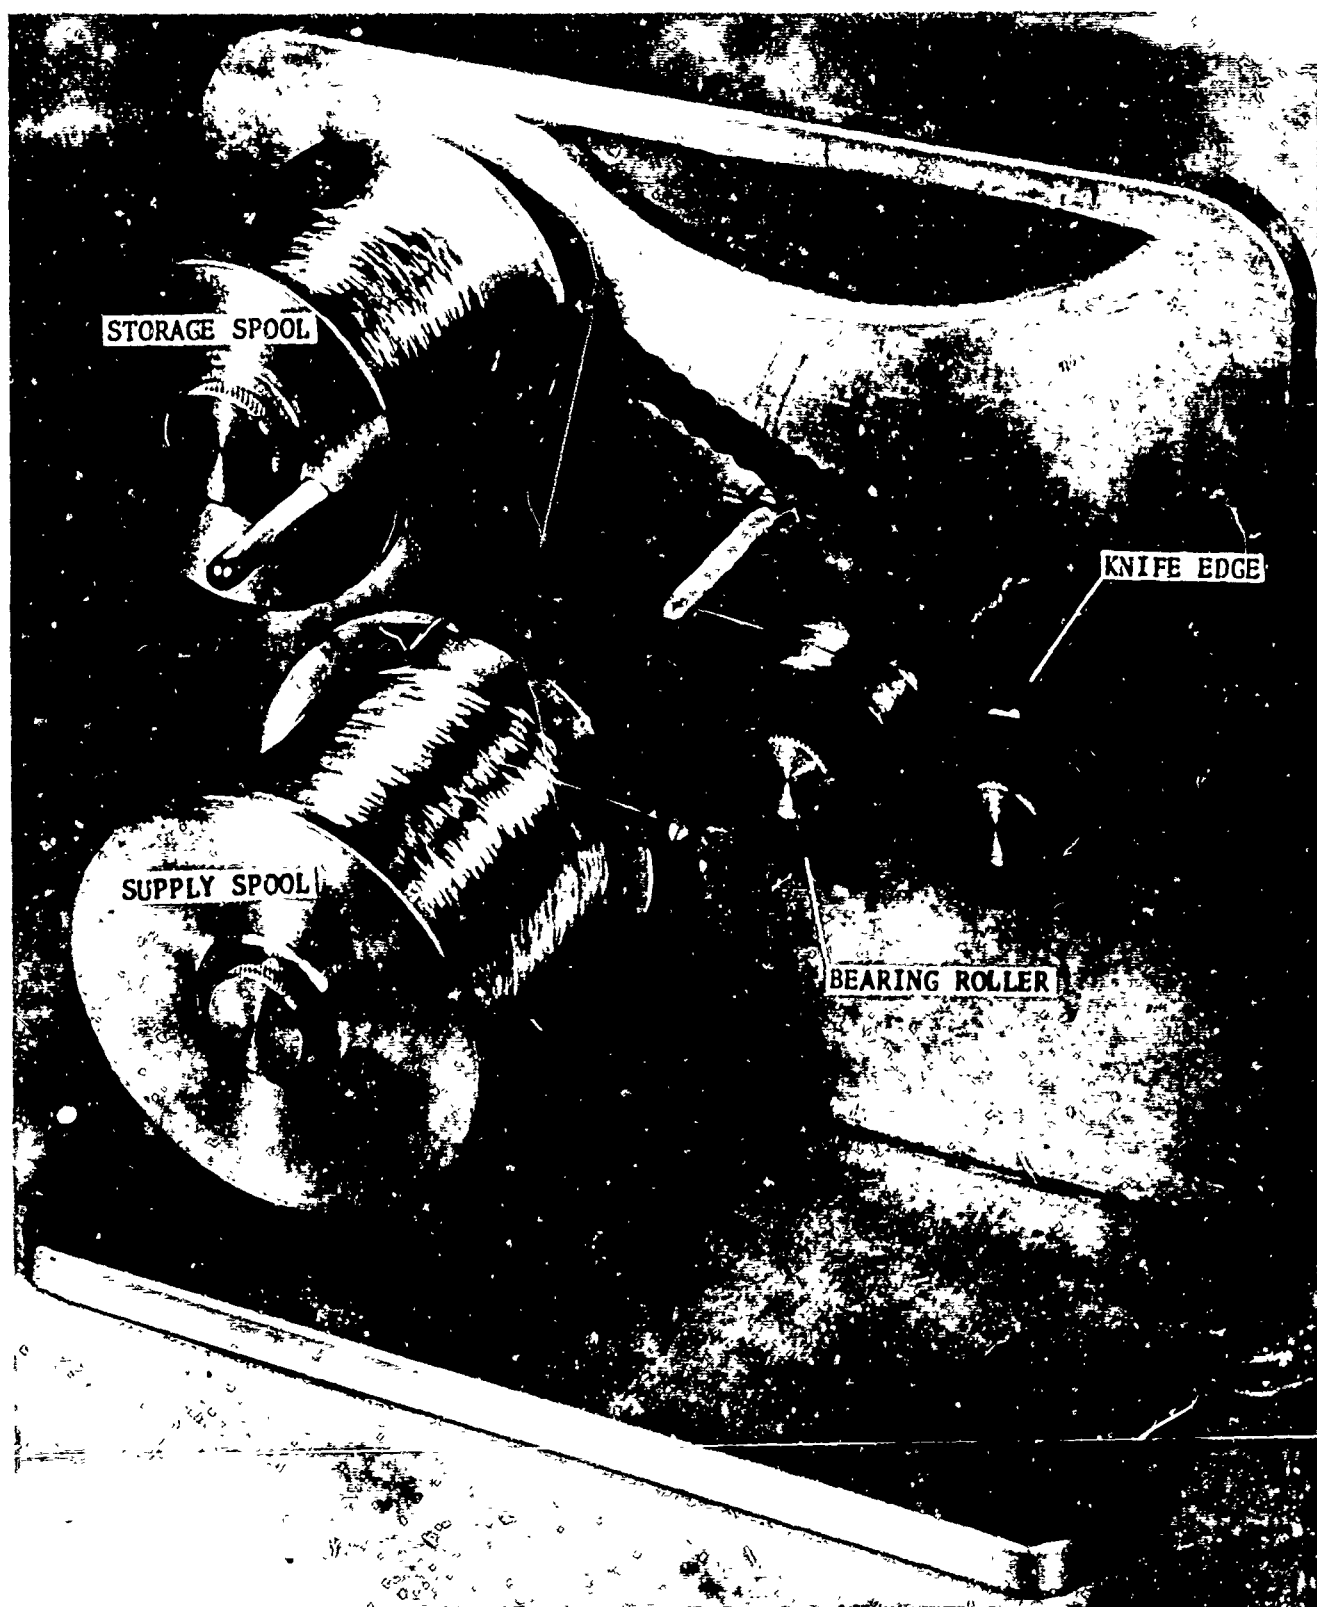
ALUMINIUM IGNITION WIRE CRIMPING RIG
